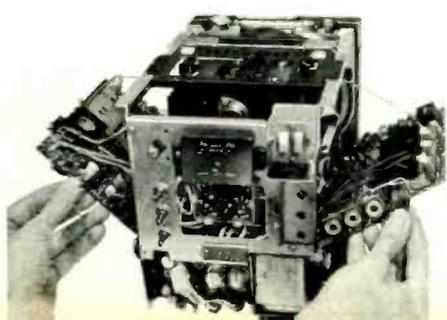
TIP-OUT BOARDS (top right) are used in MGA sets to provide access to both sides of boards.
